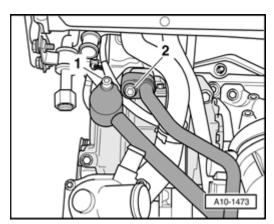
Removing Bolts & Right Refrigerant Line From A/C Compressor Courtesy of VOLKSWAGEN UNITED STATES, INC.
